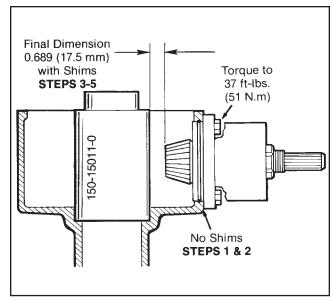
E-10. Input Bevel Pinion and Ring Gear Clearance
